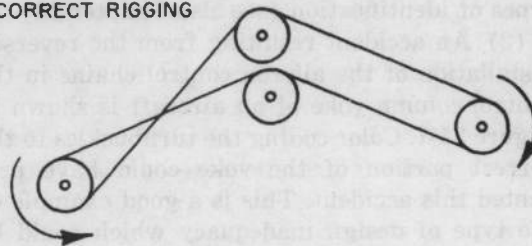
Design Aileron Control Rigging So That It Is Impossible To Install It In Reverse (Ref. 2)
